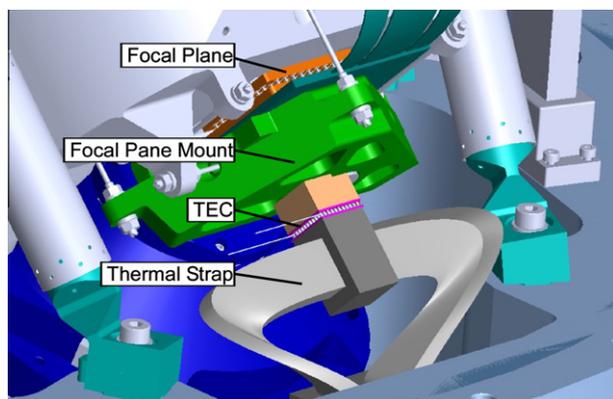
TAFTS and focal-plane mount assembly on a CAD model of the PRISM instrument.
